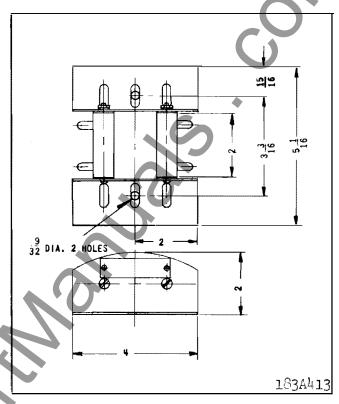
Outline and Drilling Plan for External Remote trip Resistor Assembly.
